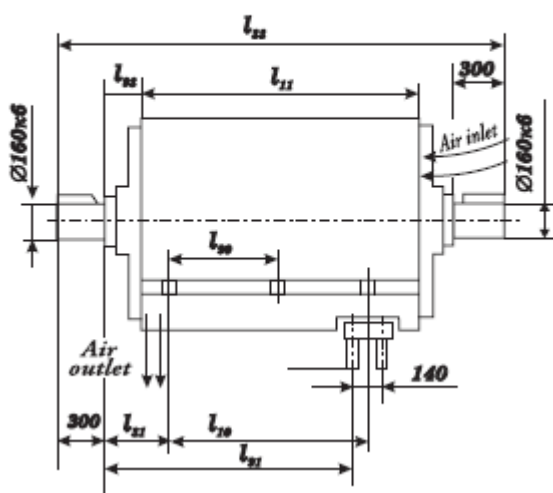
Overall and mounting dimensions of the motor CDЭ2 voltage 10 kV.
